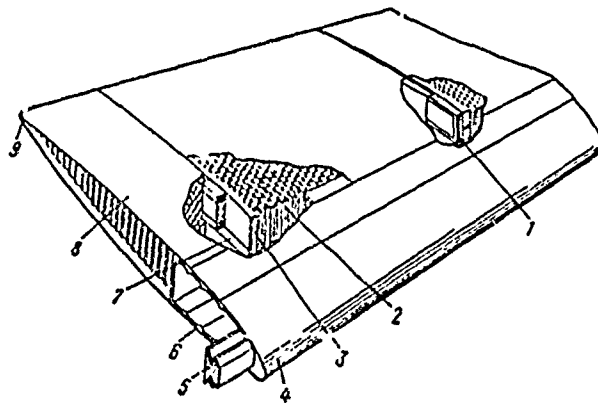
Typical Section of Main Rotor Blade with Pressed Duralumin Spar:
